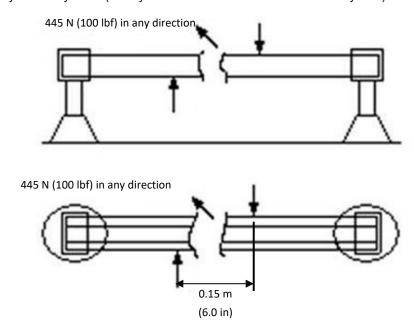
OPPOSING FORCES ON HANDRAIL/HANDHOLD
